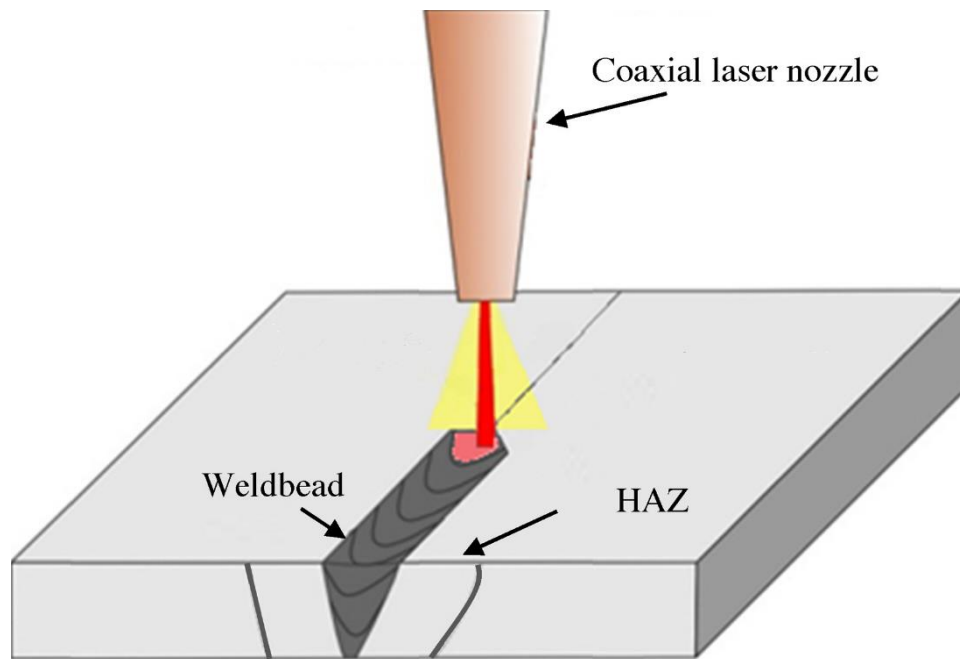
Schematic drawing of laser welding process [63].
